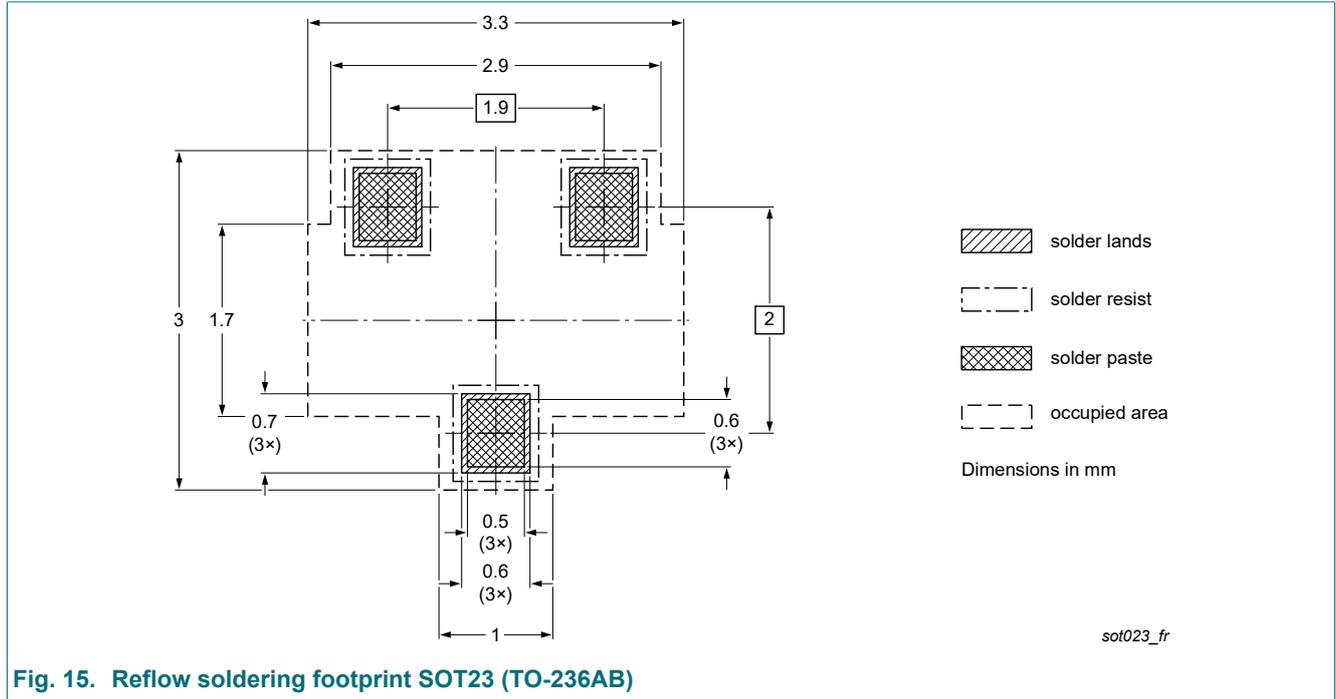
Reflow soldering footprint SOT23 (TO-236AB)
